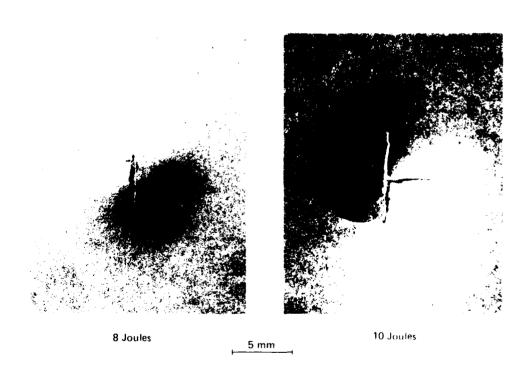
Impact damaged ARALL laminate and details of crack formation in the back face sheet (NLR)
